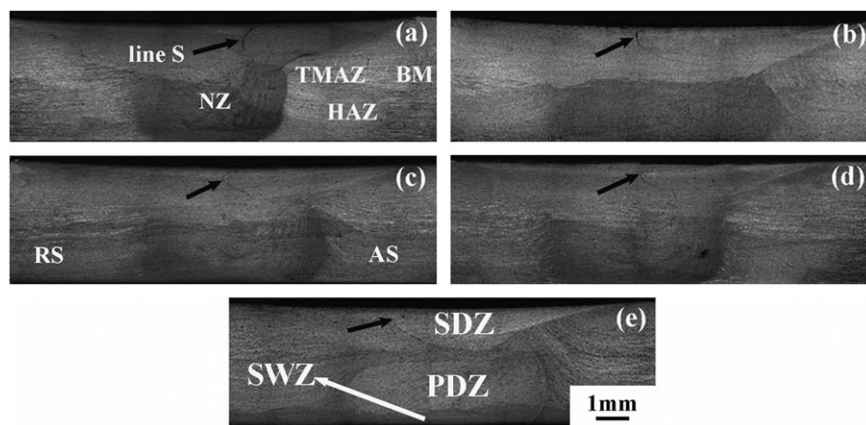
Cross-sectional macrographs of Al–Mg–Er joints with parameter combinations of (a) 400 rpm, 100 mm/min; (b) 800 rpm, 100 mm/min; (c) 800 rpm, 200 mm/min; (d) 800 rpm, 400 mm/min; and (e) 1200 rpm, 100 mm/min.
